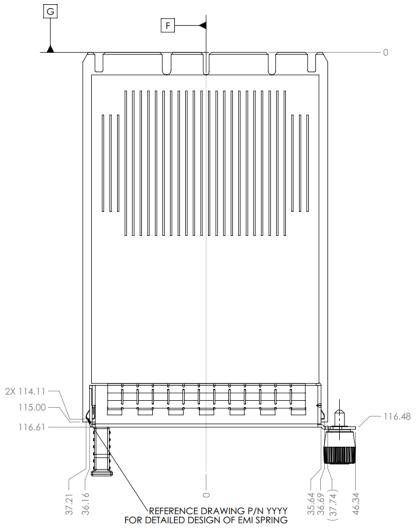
Small Form Factor OCP NIC 3.0 Card with Thumbscrew CTF Dimensions (Front View)
